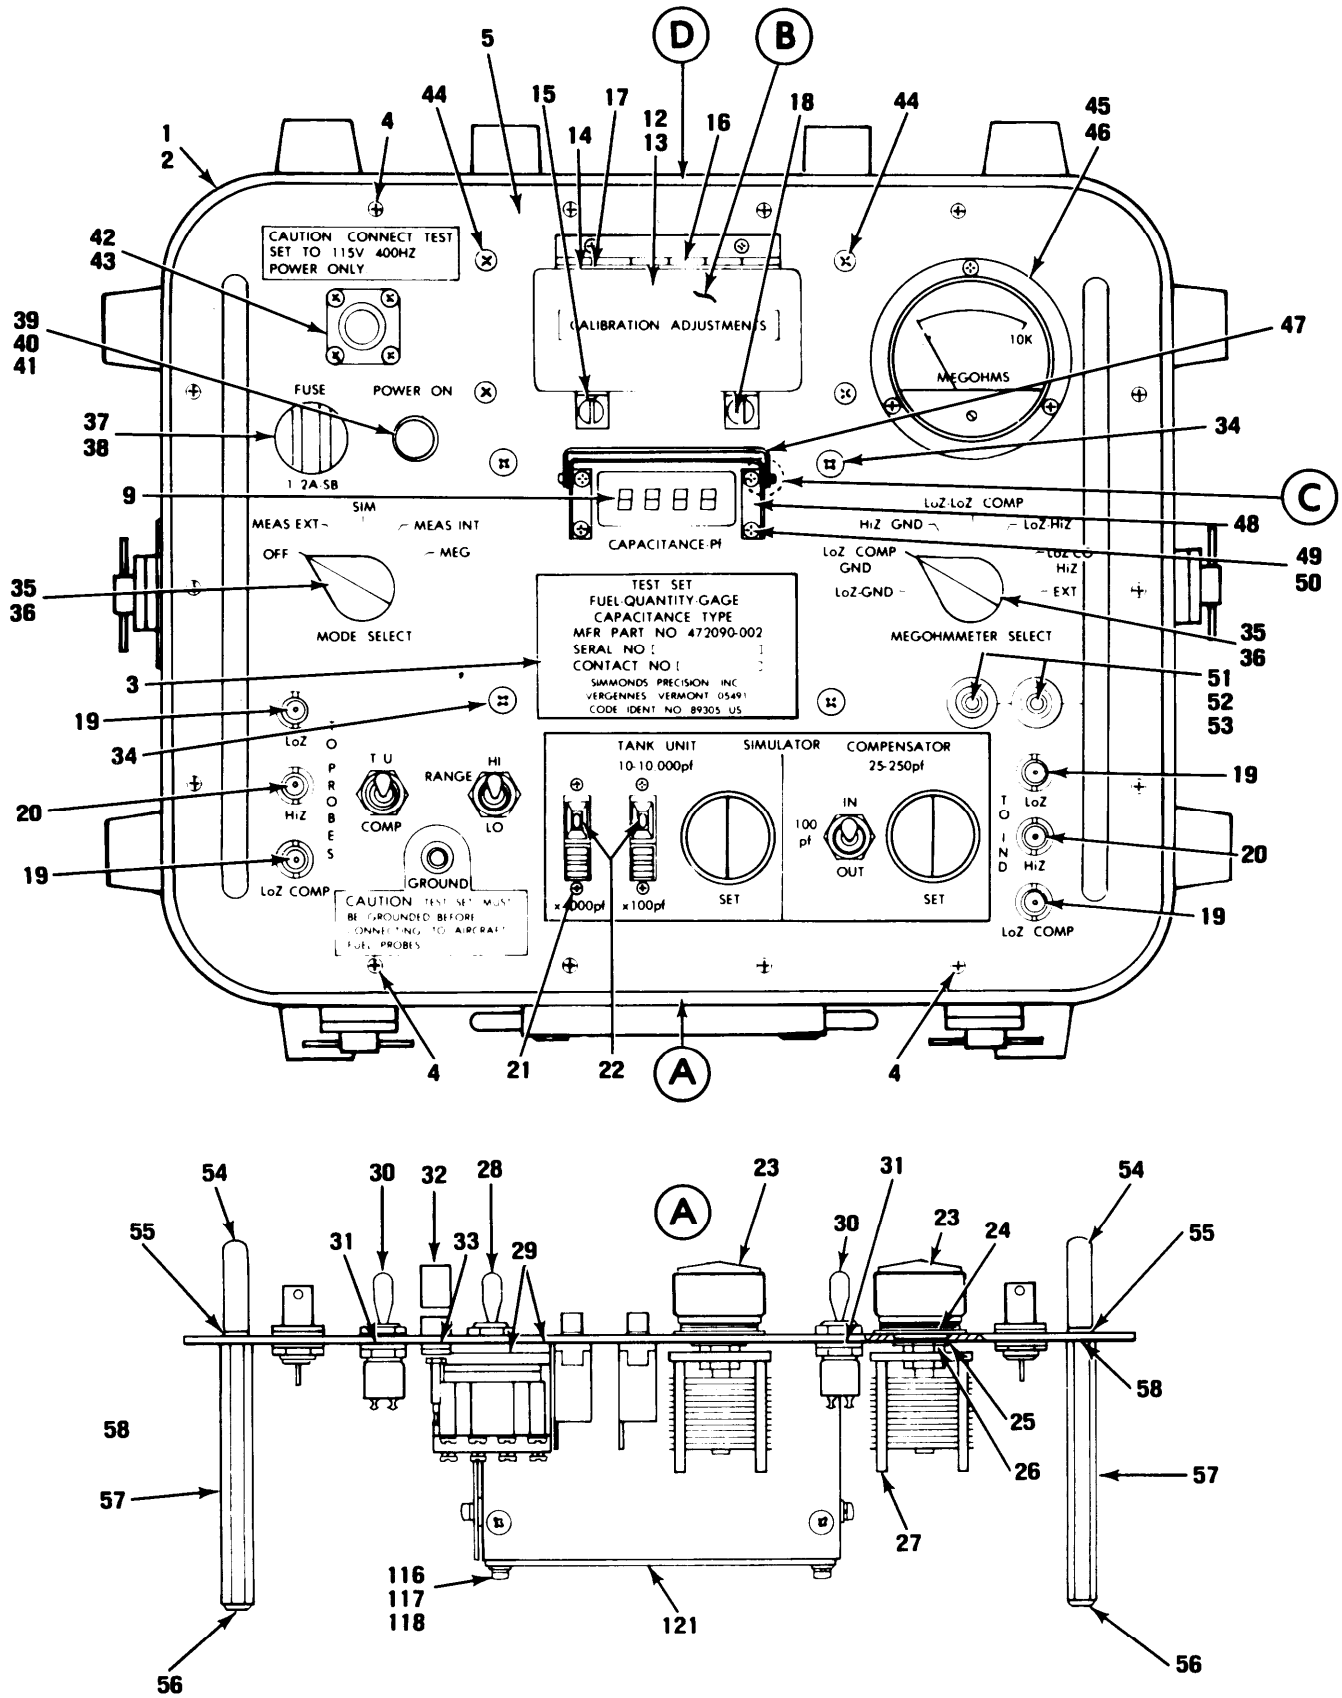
Case and Front Panel Assembly (Sheet 1 of 4)
